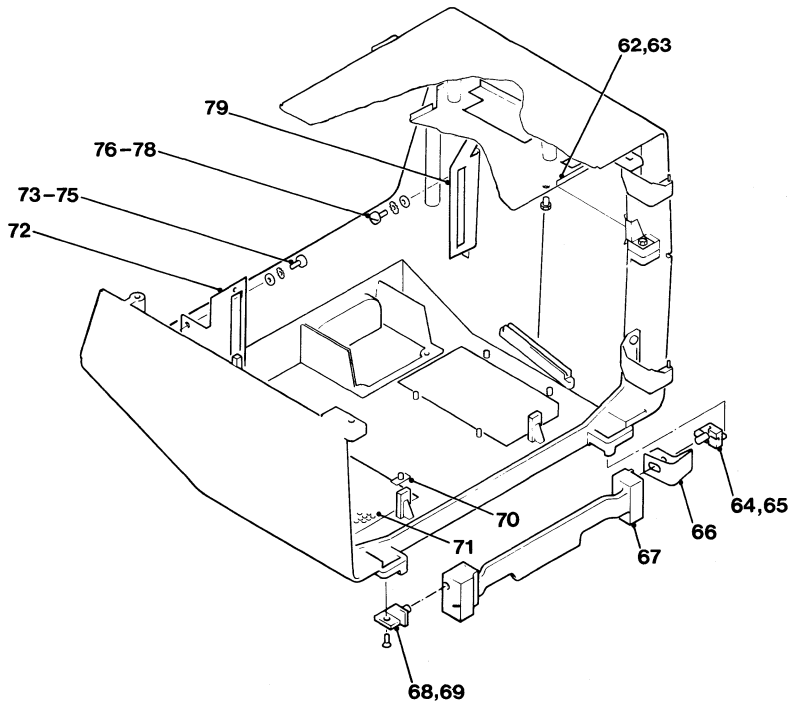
(Sheet 4 of 4). Front Enclosure Assembly
